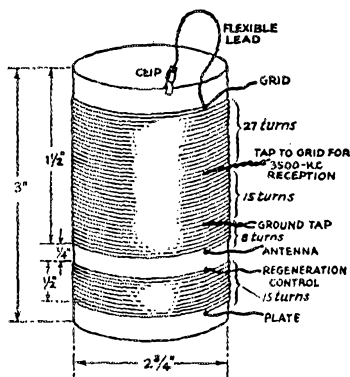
DETAILS OF COIL CONSTRUCTION
